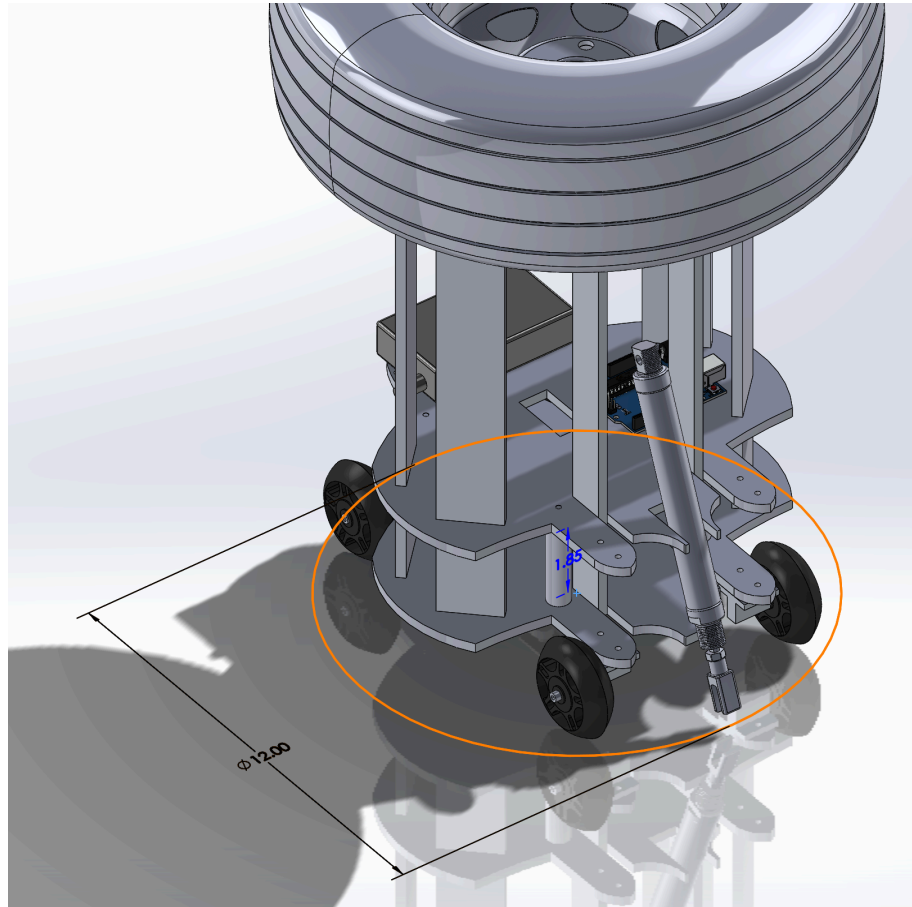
Dimensioned view showing that whole chassis fits into 12" diameter circle
